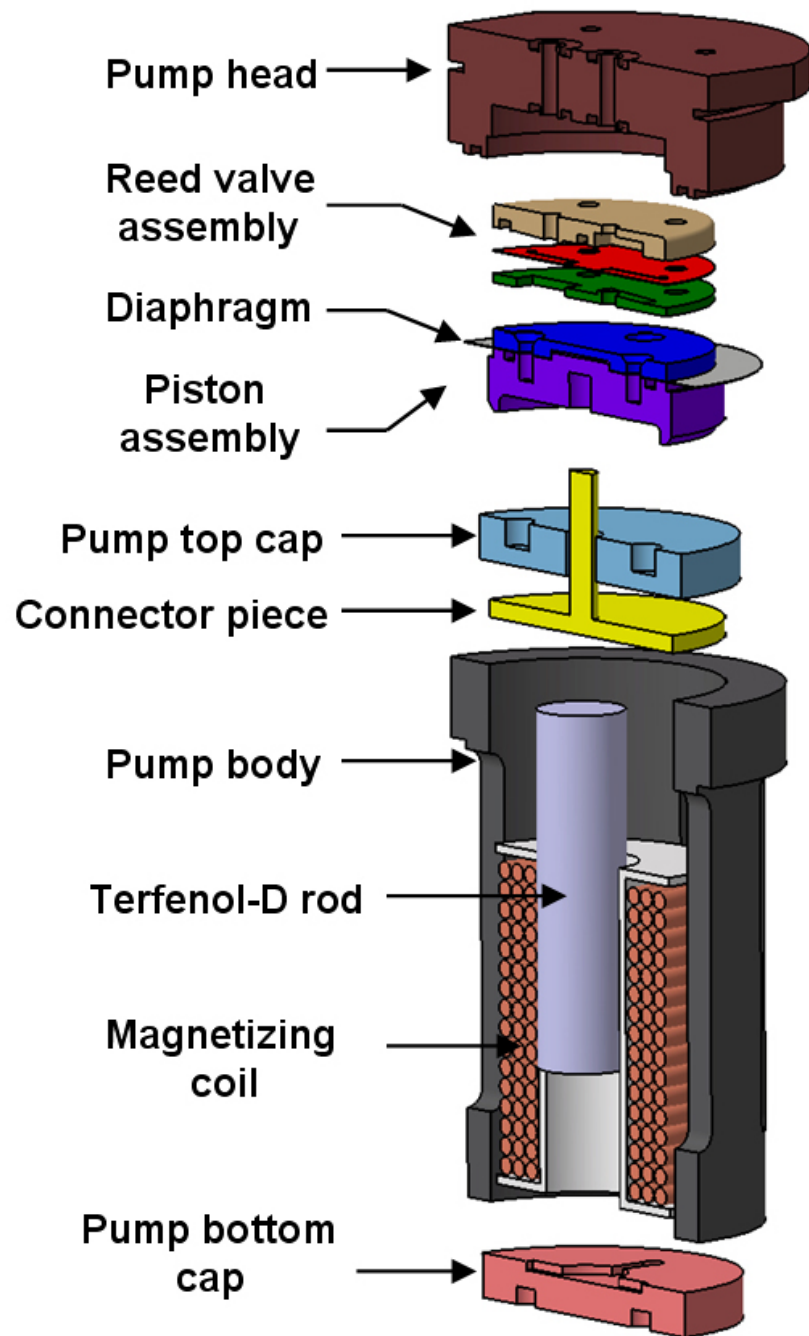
Exploded section view of Terfenol-D driven pump assembly
